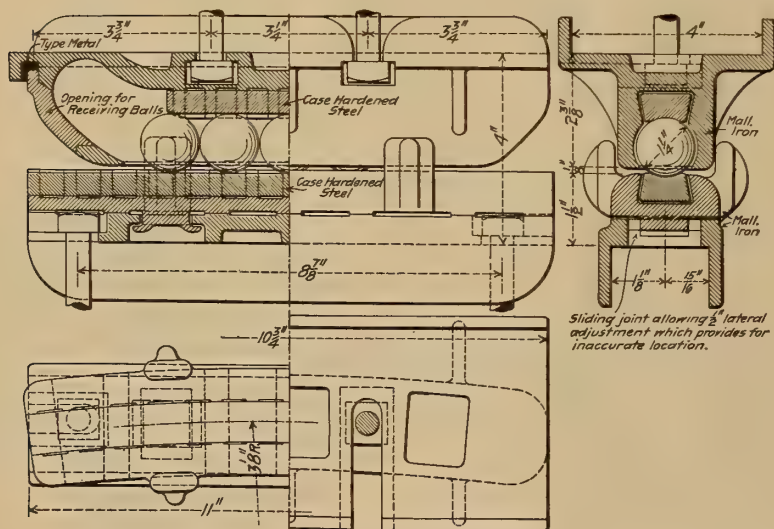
AUTOMATIC FRICTIONLESS SIDE BEARING.
